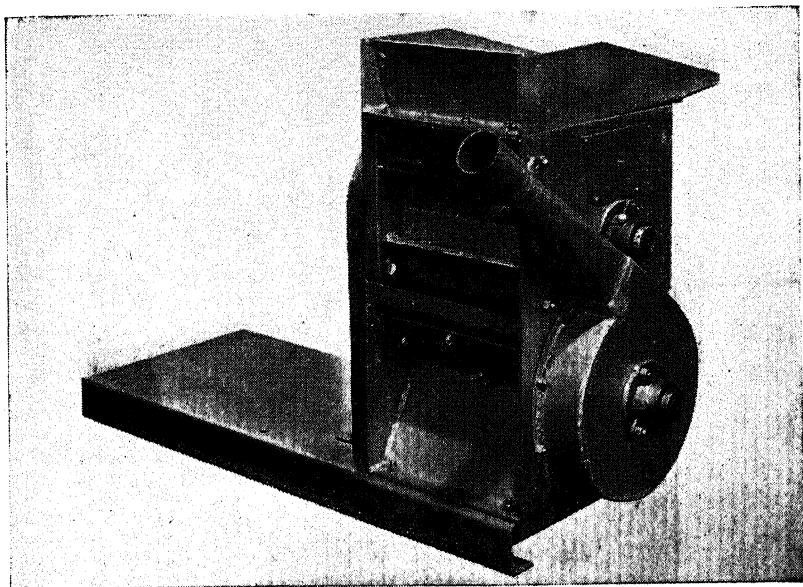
Ice slinger of welded construction built from shear cut and brake formed plate and standard mill shapes. Note simple, pleasing design of base.
